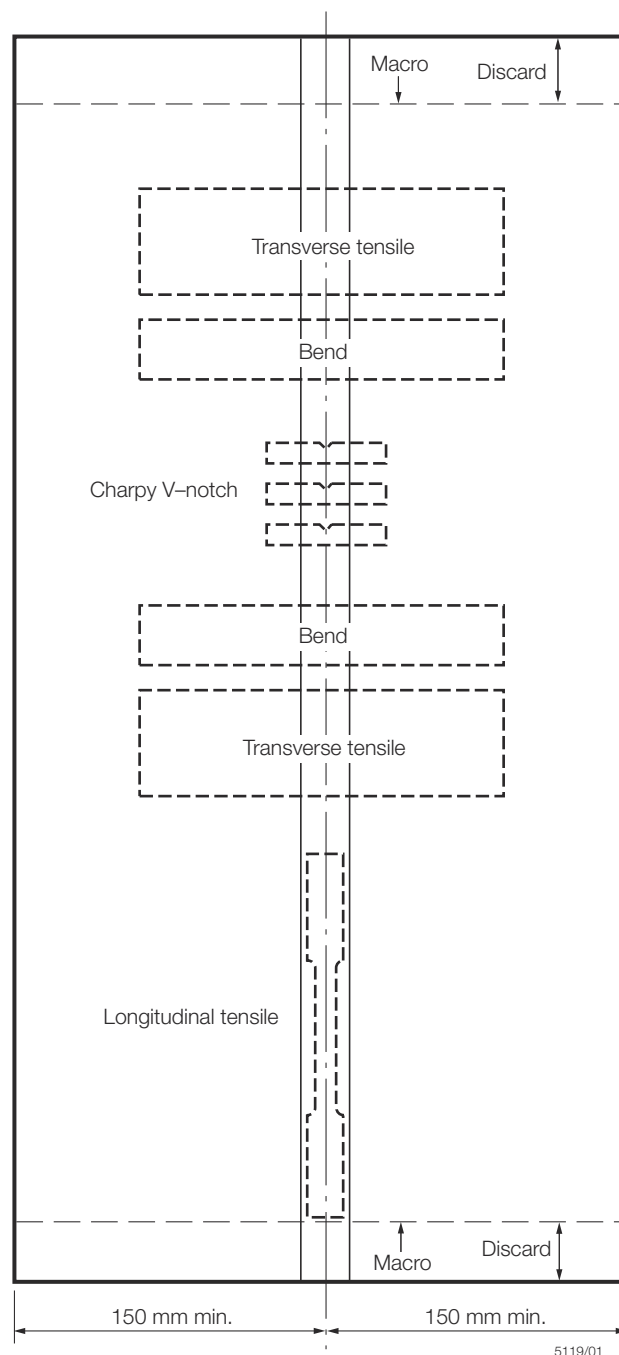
Butt weld test assembly (two-run technique)
